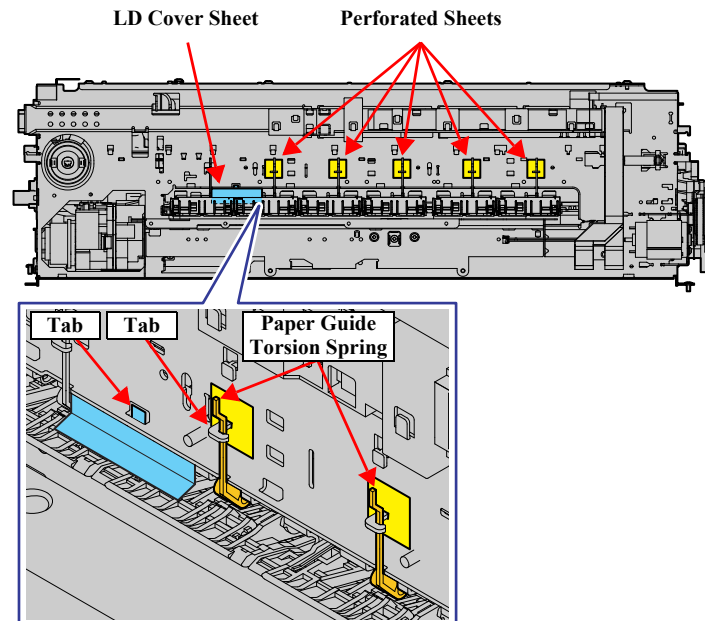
Attaching the Perforated Sheets and the LD Cover Sheet
